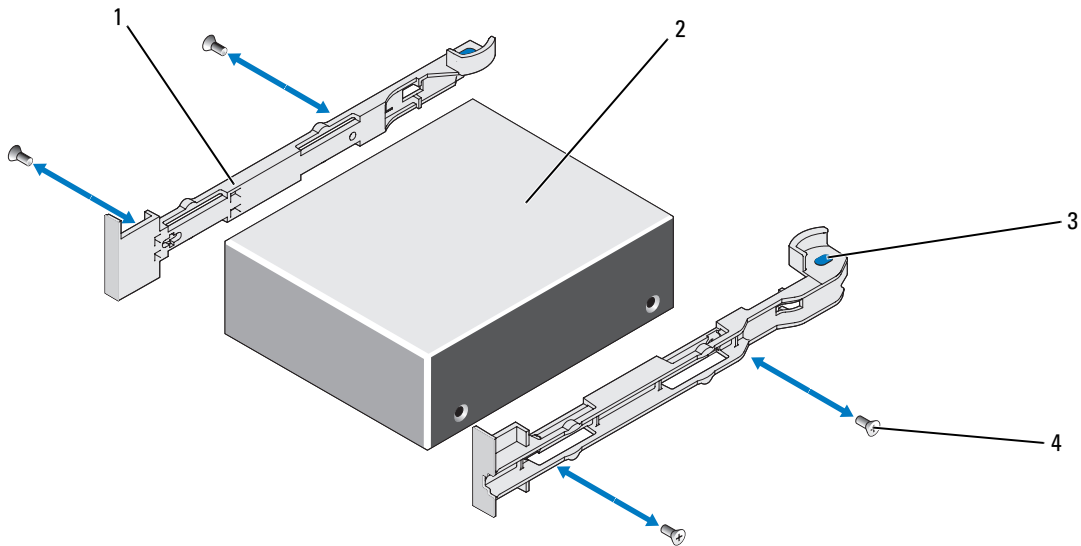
Removing and Installing the Tape Drive Carrier
